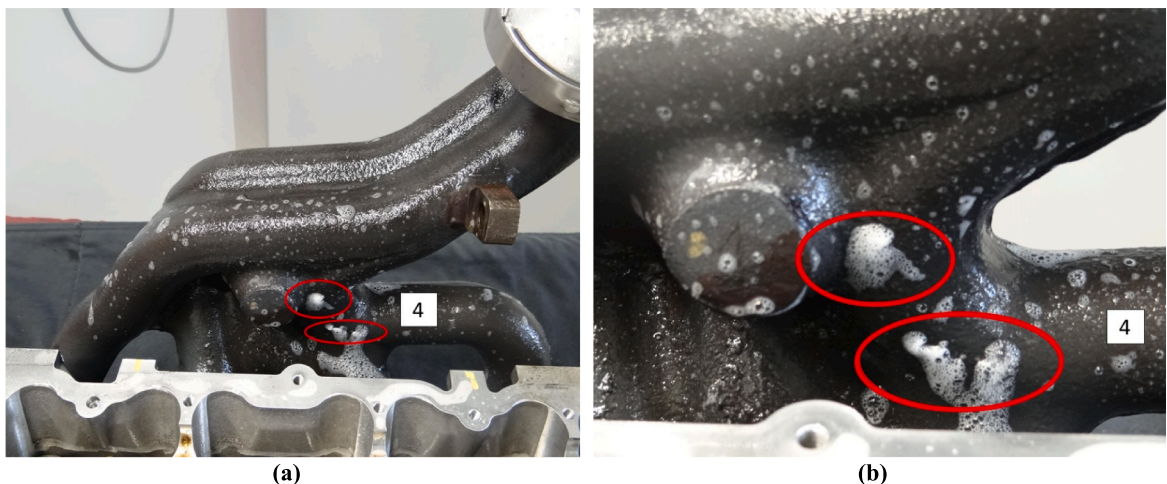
Engine C1- Bubble test (a) the right-hand side exhaust manifold; (b) detail of the failure.
